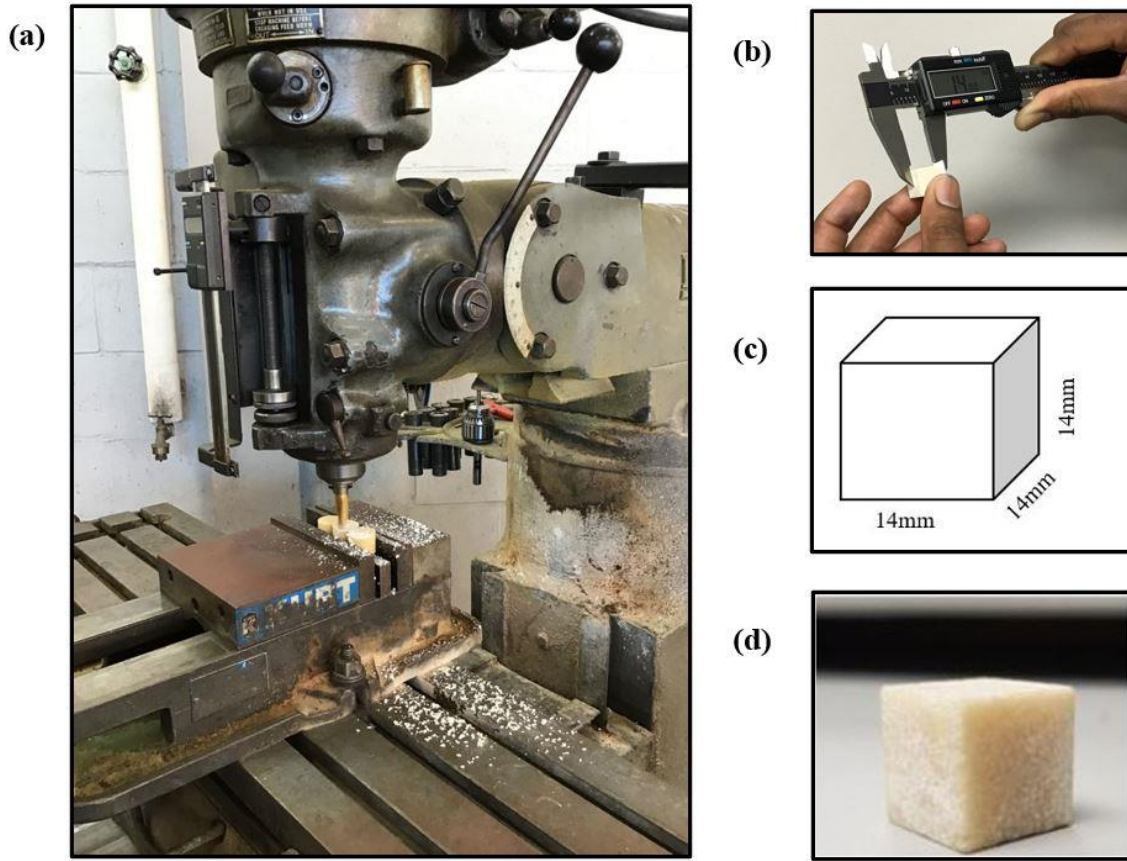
(a) Specimen being machined by vertical milling machine (b) The specimen being measured with a caliper (c) Dimension of the specimen (d) polymers bonded explosive sample.
